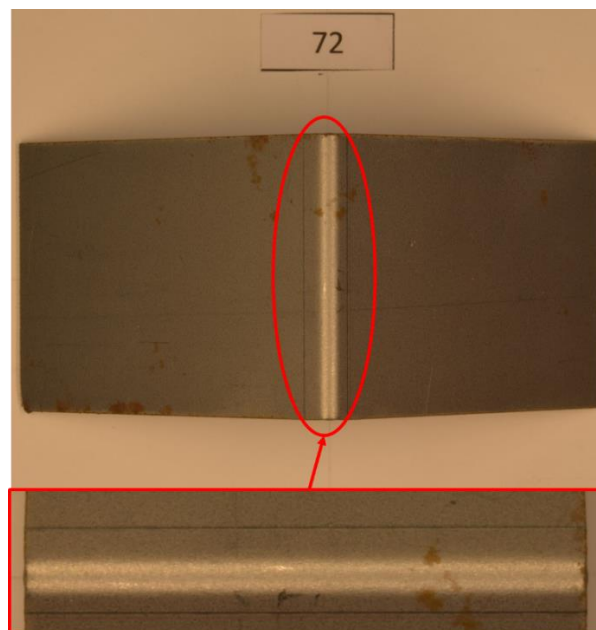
17: example of aesthetical defects on a specimen bent with metal tool.
